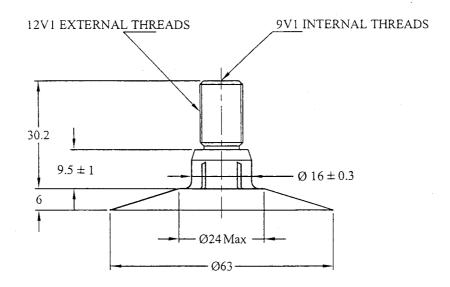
Tractor Valve B 30 5 63 Air Water Filling Type (see Fig. 14 for Assembly)
